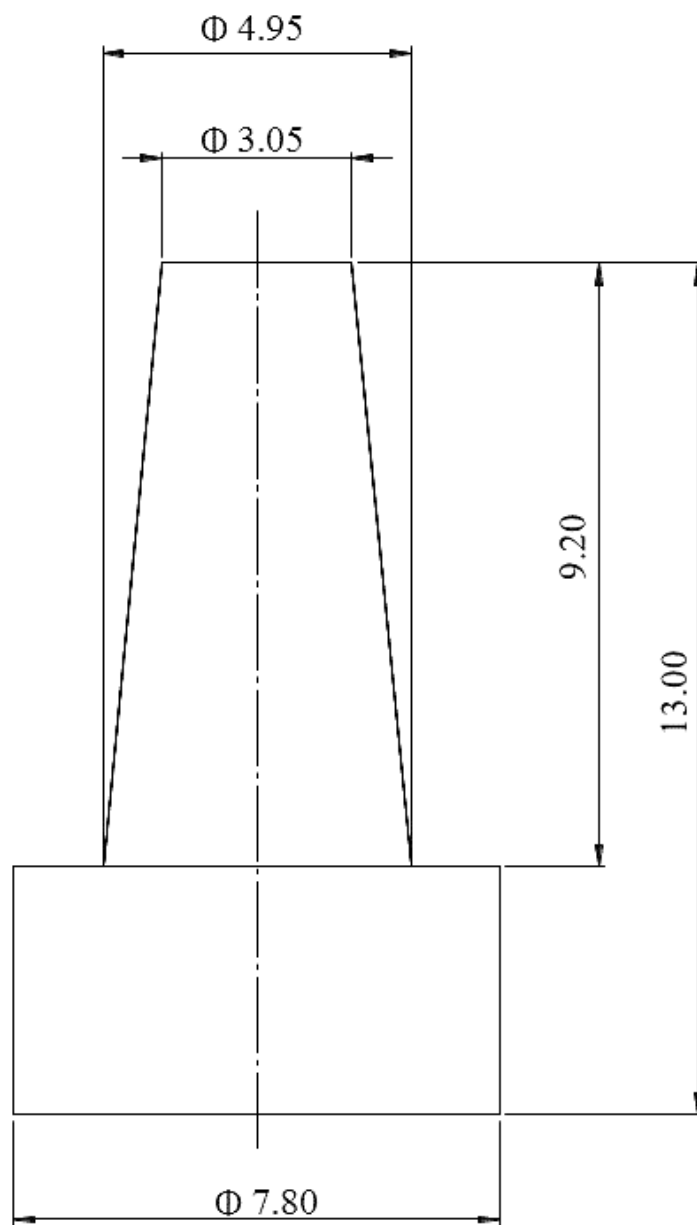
Details of workpiece used in the biocorrosion tests (Geometry 2).
